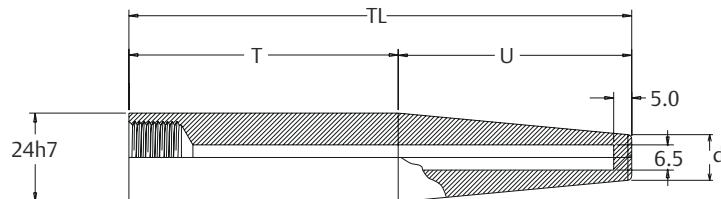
Weld-In Barstock Thermowell (Codes W10, W12, W14, W16)
